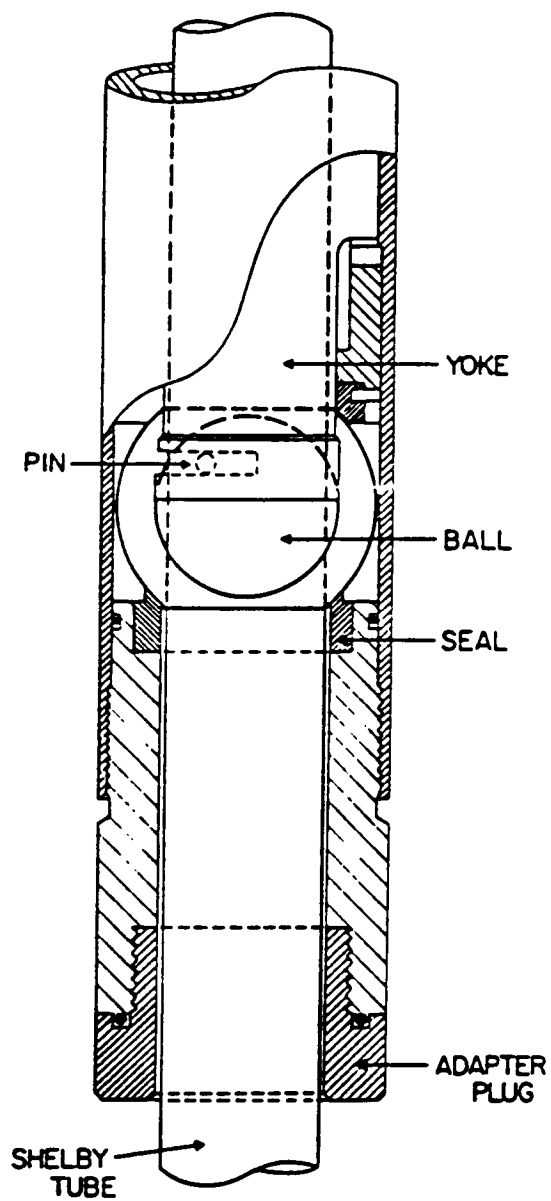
Pressure core barrel ball valve assembly with Shelby tube extended.
